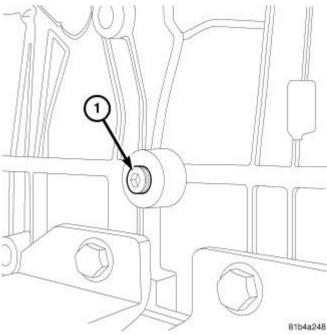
Crank Lock Plug Location Courtesy of CHRYSLER LLC
